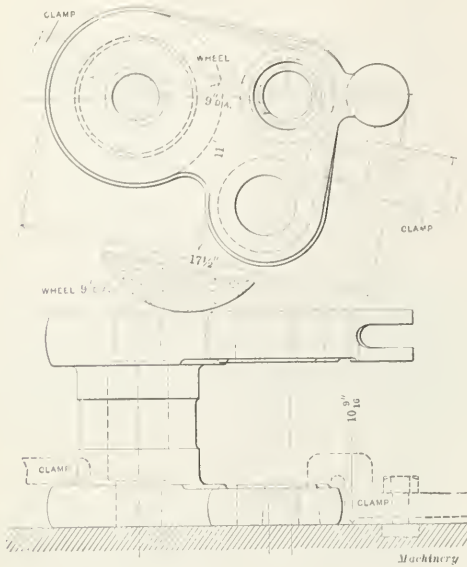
Method of grinding a Wrist for a Plain Milling Machine
